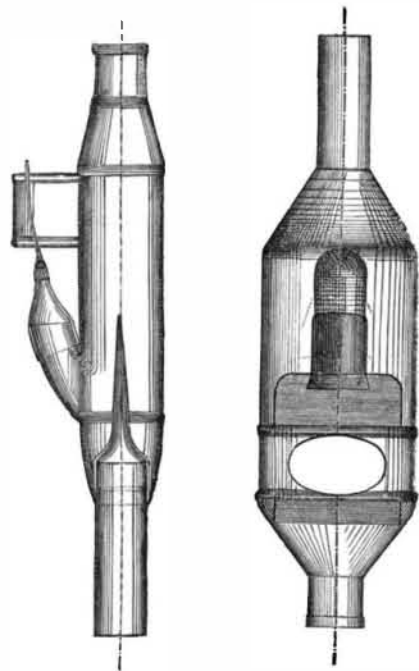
Valve Box of Rouquayrol's Apparatus. Fig. 4.—Valve Box, Enlarged and in Section.
